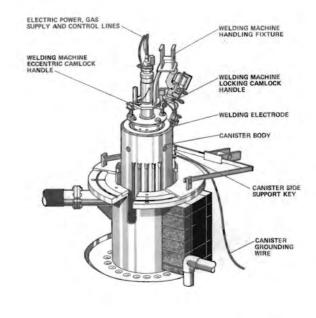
Canister Closure Lid Seal Welding Arrangement
